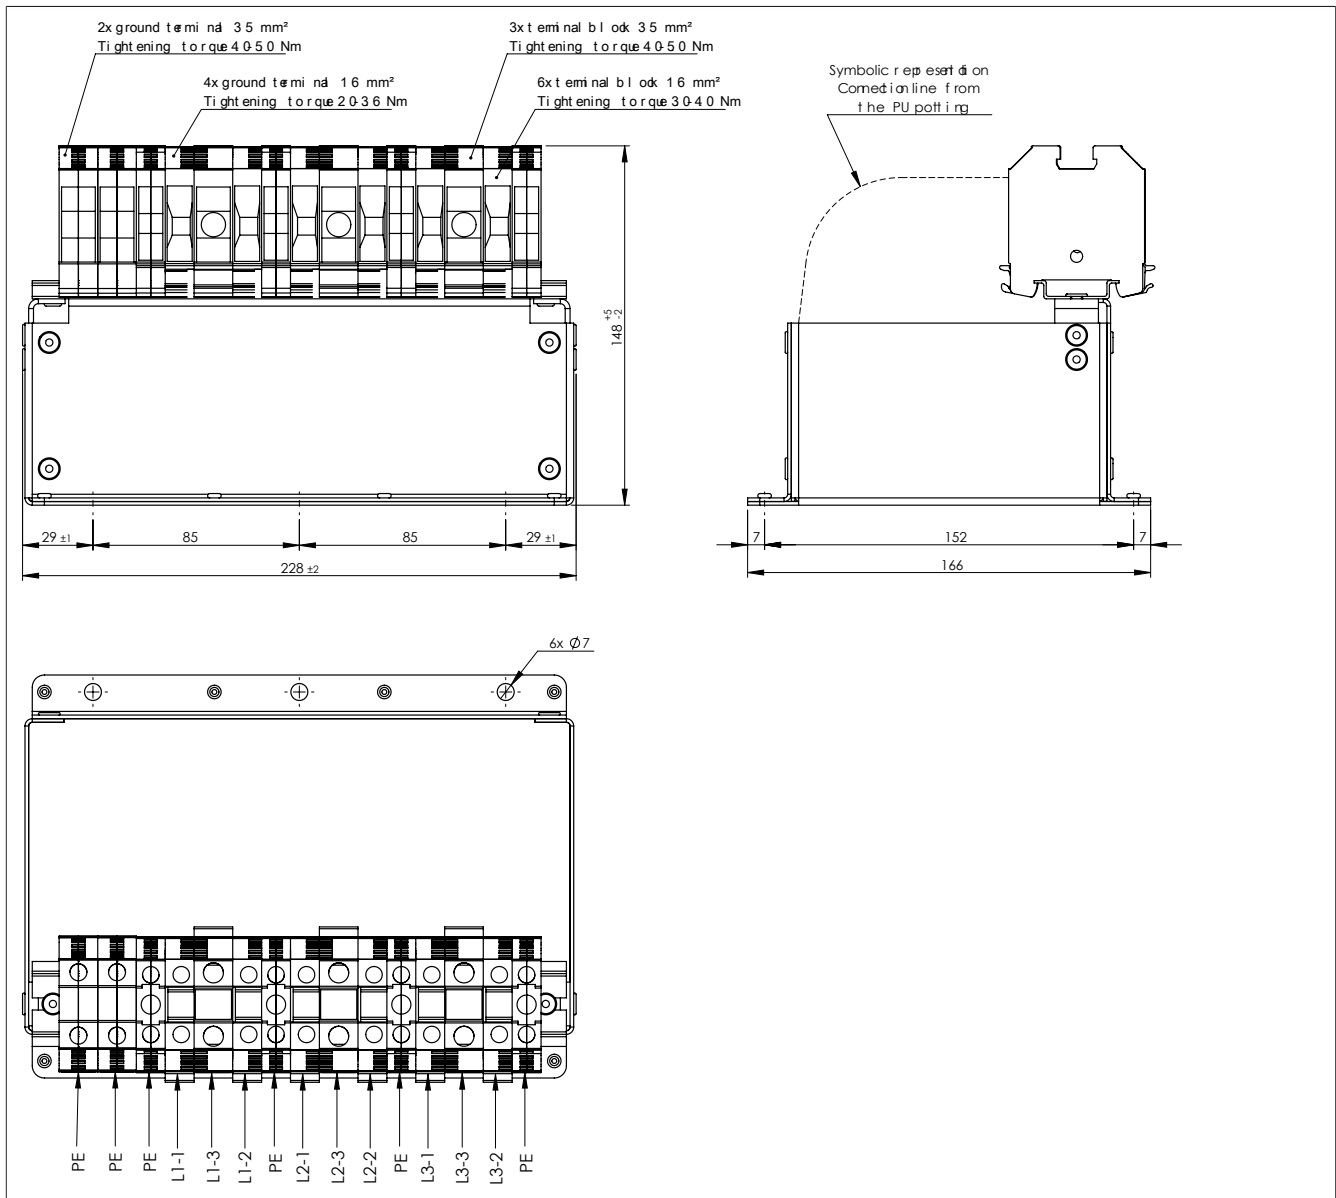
8ER0880H300.000-1 - Dimension diagram and installation dimensions
